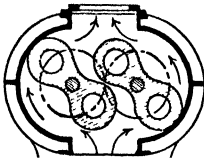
Positive displacement rotary compressor. (Roots-Connorsville Blower Corp.)
